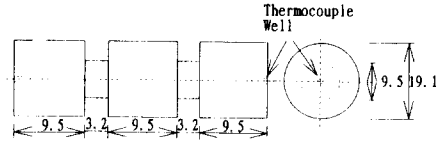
Schematic of double shear test specimen geometry. The dimension is in mm
